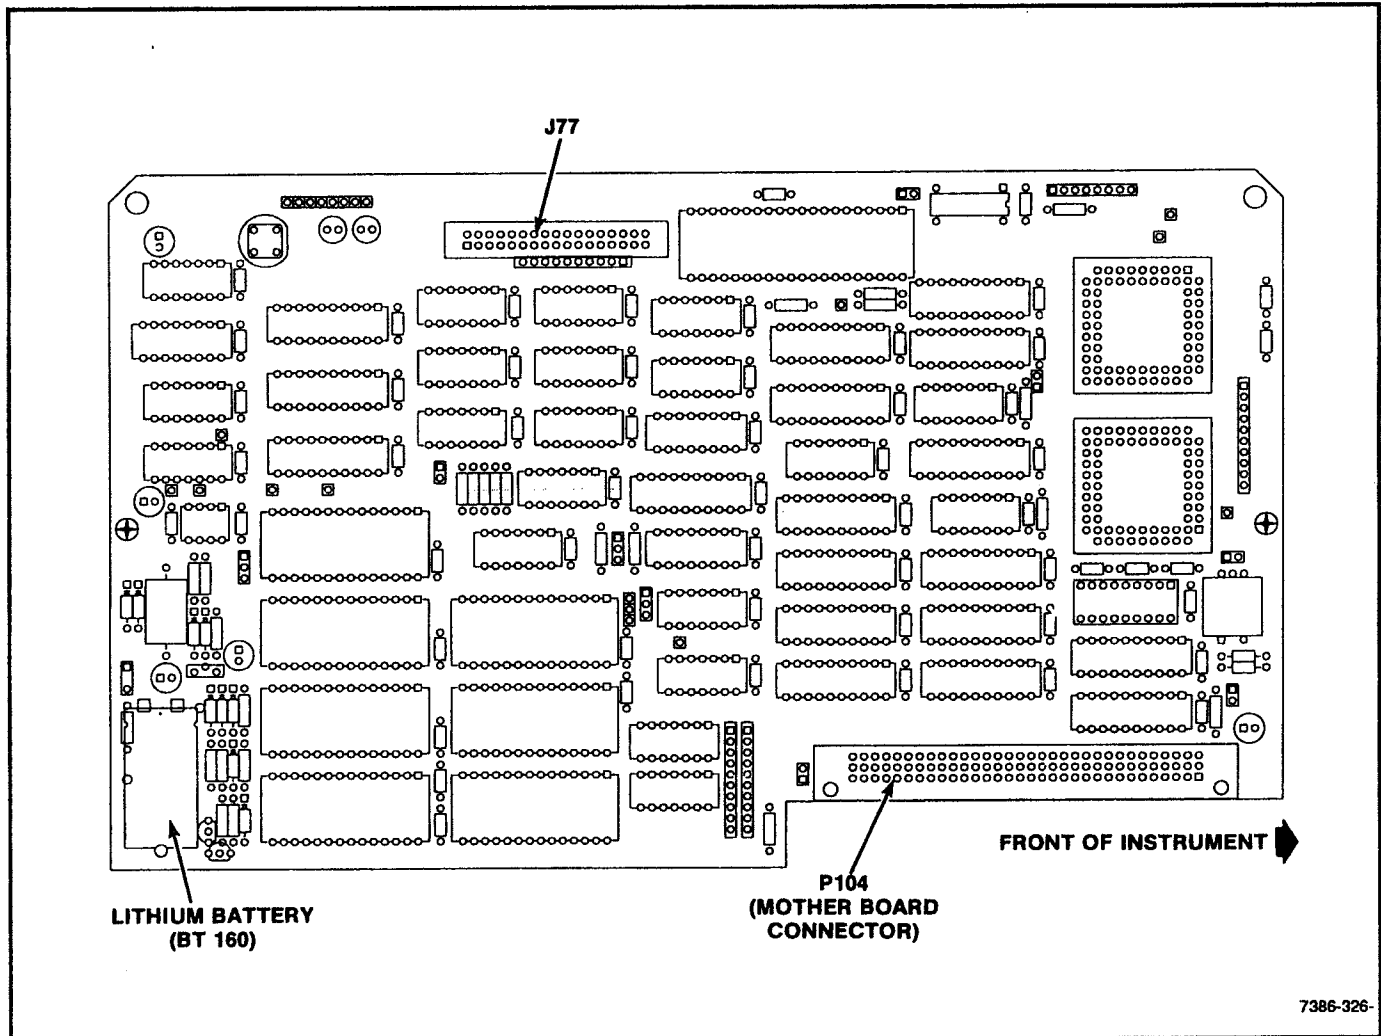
Connector locations for removal of the A17 Main Processor Board
